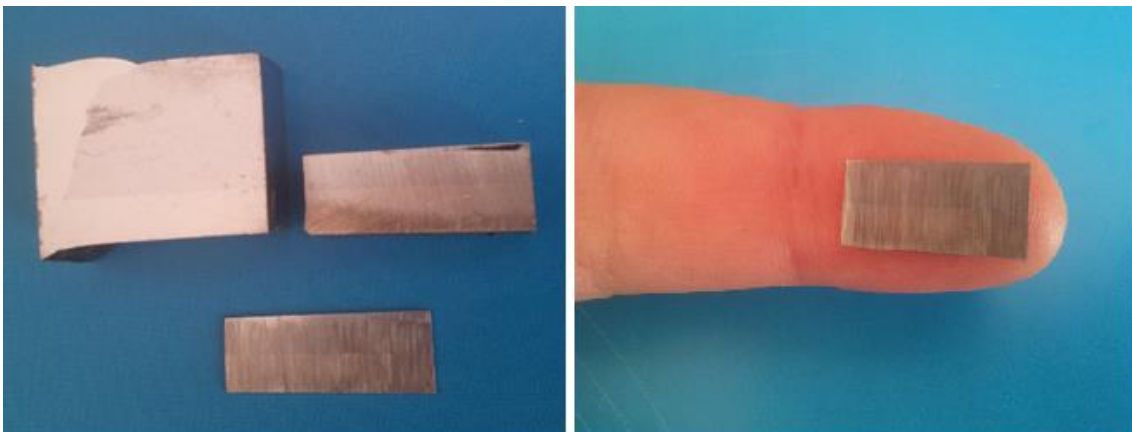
Sample 2: Left: Macro specimen and sectioned TEM specimens. Right: TEM specimen placed on finger for grinding (tape is missing).
